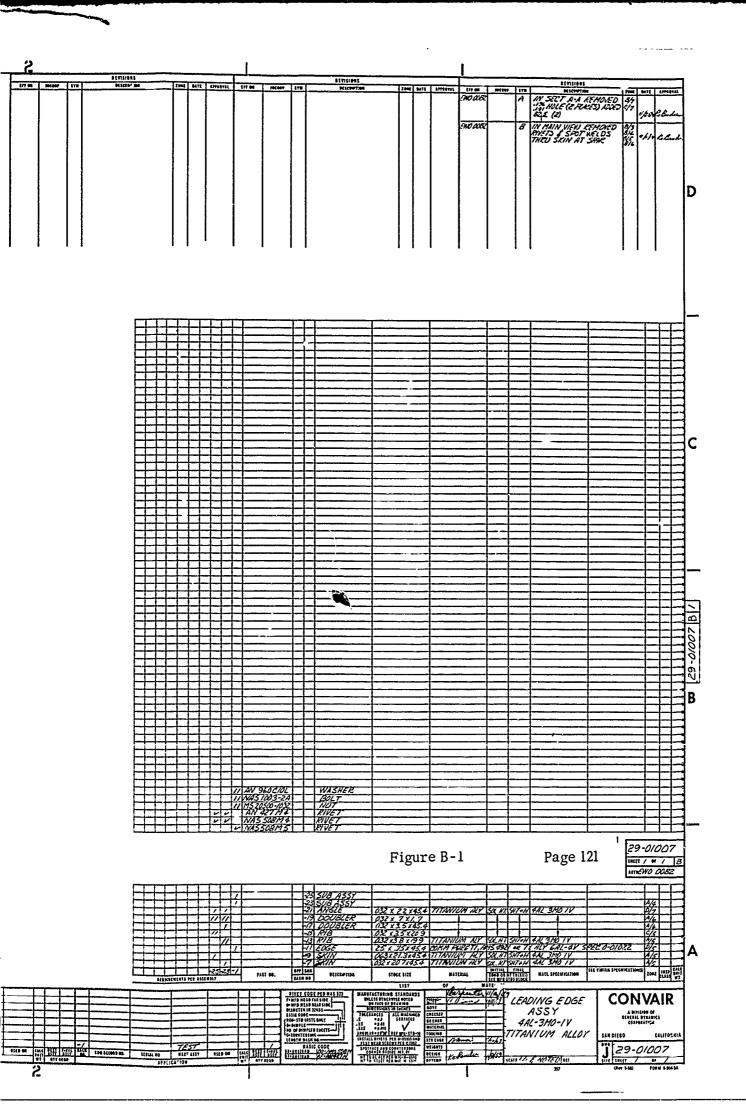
WING LEADING-EDGE ASSEMBLY; Engineering Drawing 29-01007
